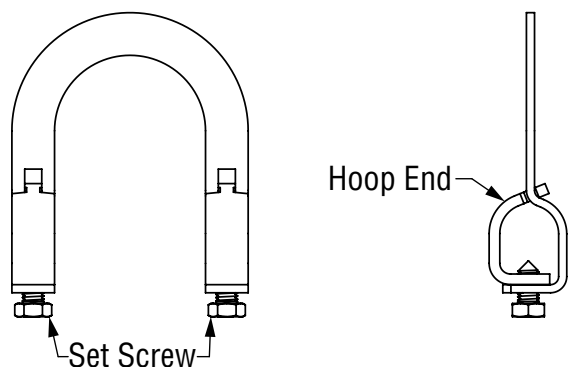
DIMENSIONS (IN) • WEIGHT (LBS)
